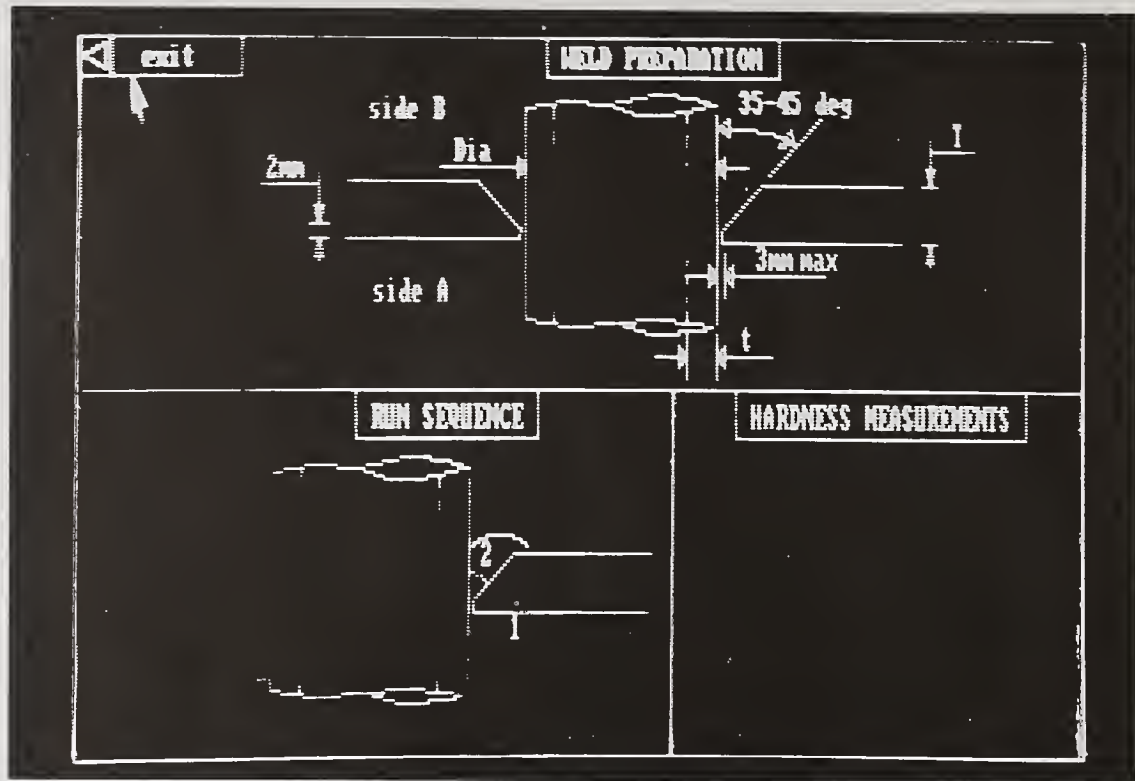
A diagram showing a tube-to-tube plate weld from WELDSPEC.
